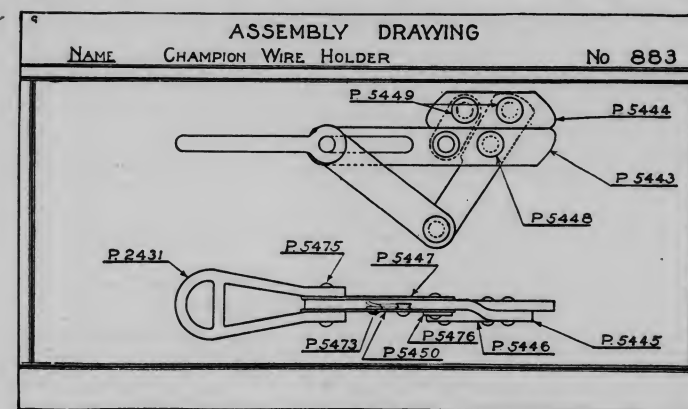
EXHIBIT G. ASSEMBLY DRAWING OF CHAMPION WIRE HOLDER
